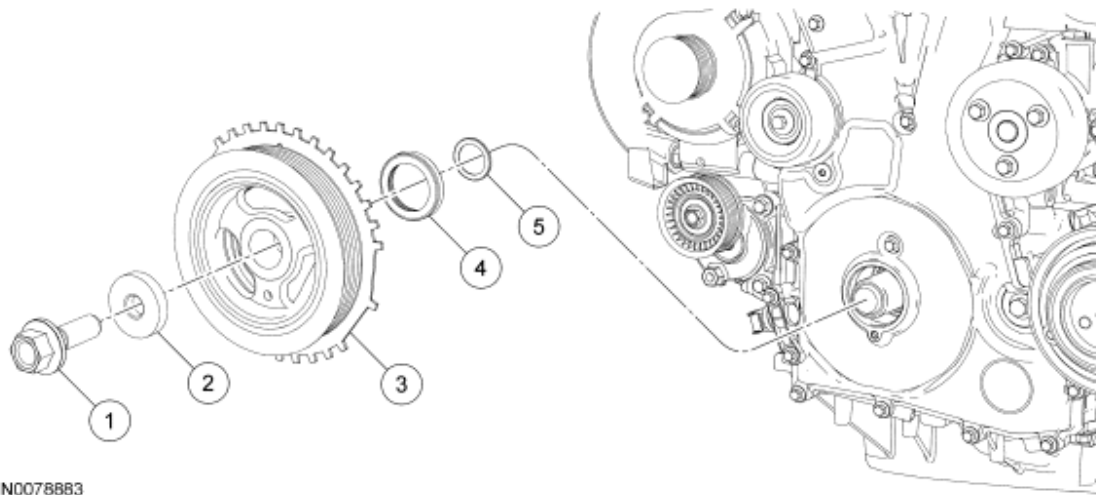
Exploded View Of Crankshaft Pulley & Crankshaft Front Seal - Lower End Components
